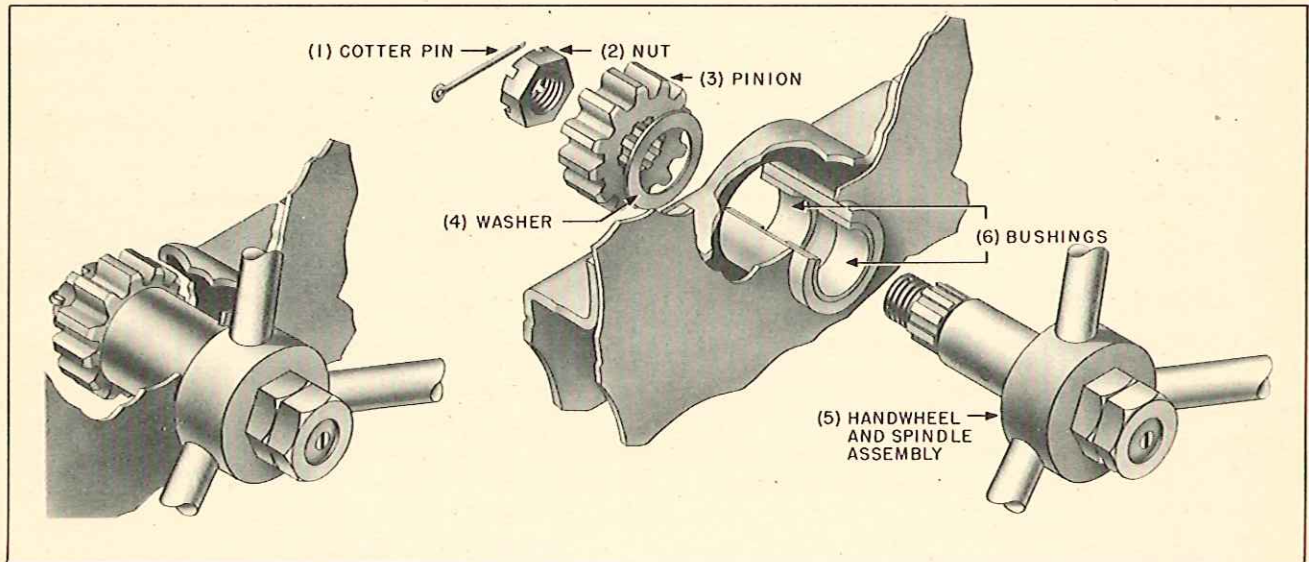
Pinion (outside handwheel), assembly and exploded views, TLD-3 (ms) door.
